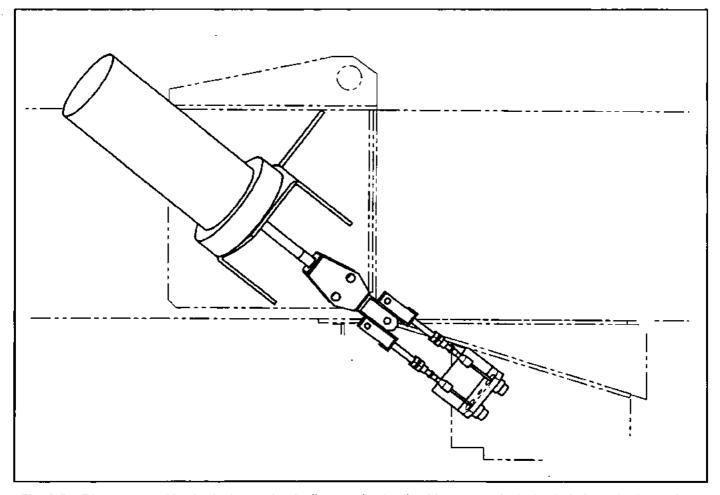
Disengage parking brake by mechanically screwing turnbuckle counterclockwise (relative to brake canister) until spring is compressed. Screw turnbuckle clockwise to engage parking brake.
